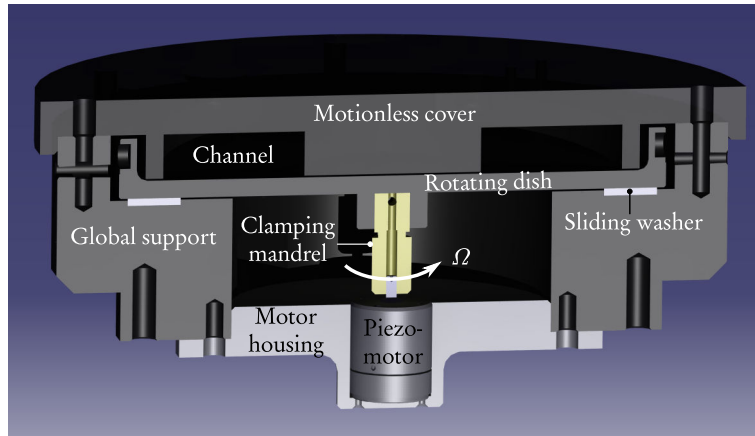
Cross-sectional CAD view of the annular channel and the motor block.
